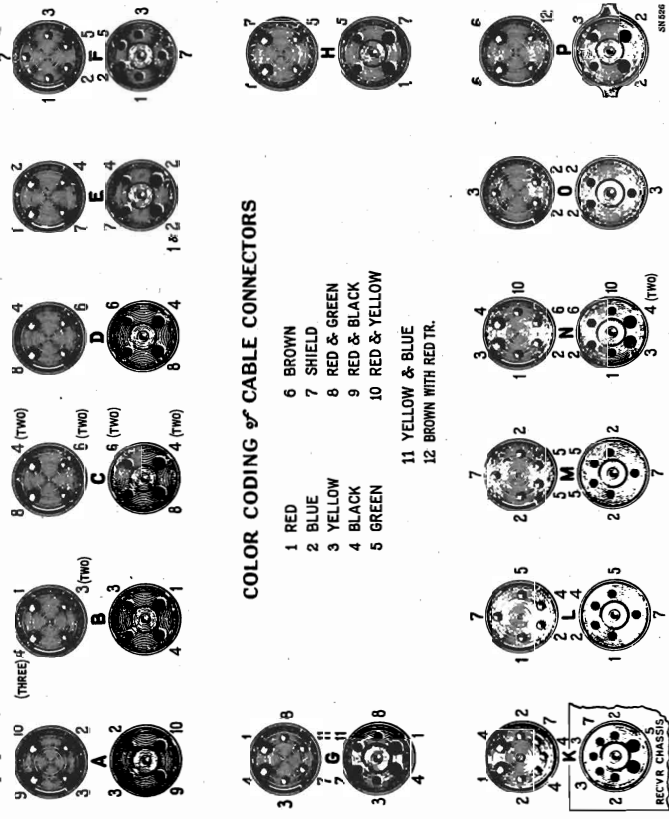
Socket and Plug Details of Assembly Wiring (Refer to Figure 14)
